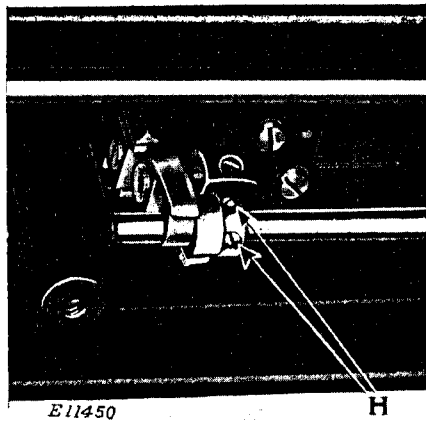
View of Machine 136w105 Showing Adjustment for Timing the Knife
